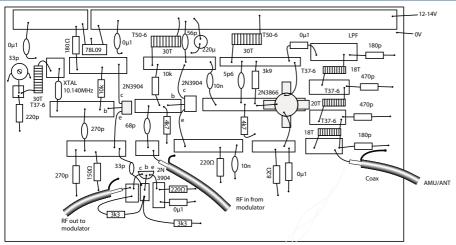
General layout of the RF board, constructed using 'Manhattan'-style construction.
